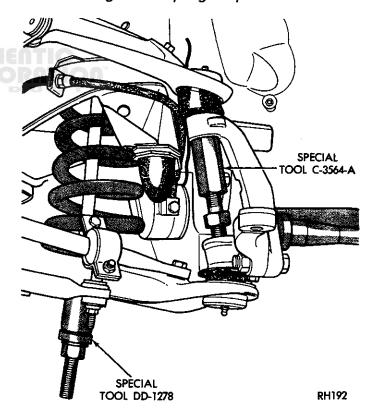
Spring Compressor & Ball Stud Loosening Tools Installed
